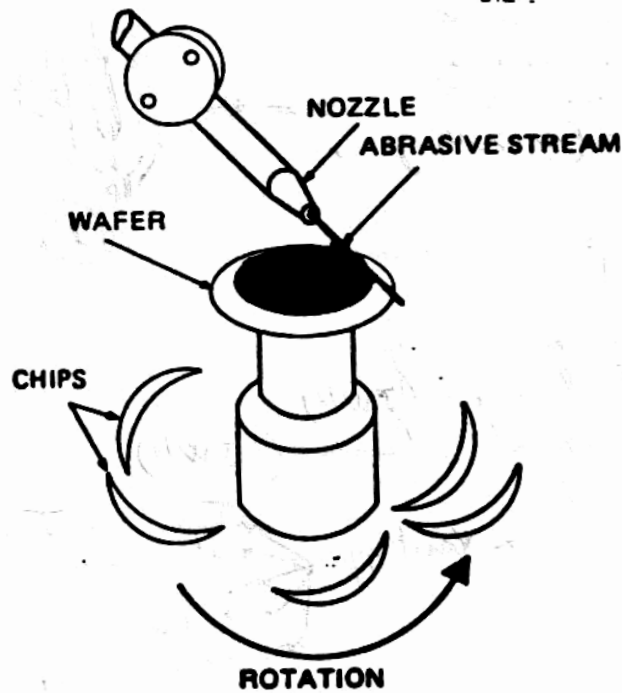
Technique used for AJM-trimming of silicon/tungsten disks.
